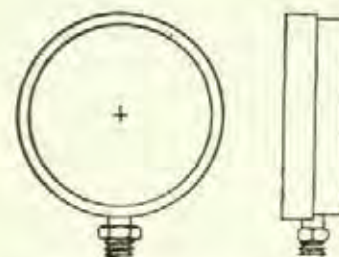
DIRECT MOUNTING GAUGE WITH BOTTOM CONNECTION
